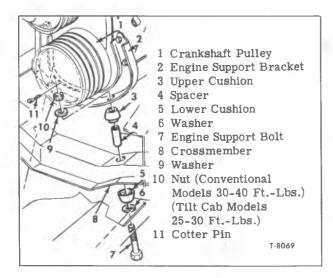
Engine Front Mounting (V8 Gasoline Engine Model)
